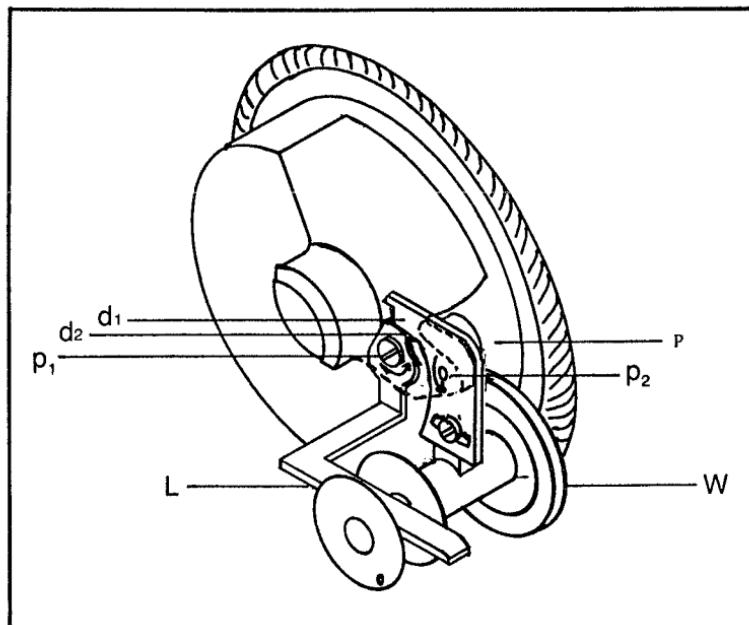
This sketch of a rather old Bel Air (Japanese manufactured) bobbin-winding arrangement is fairly typical of many machines in use today. Lightly lubricate the pivot points with sewing machine oil to make the mechanism operate efficiently.
